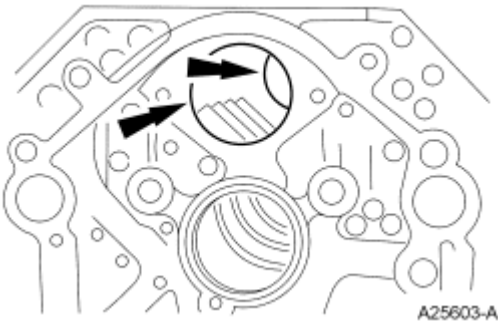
Identifying Engine Dynamic Balance Shaft Bearings
